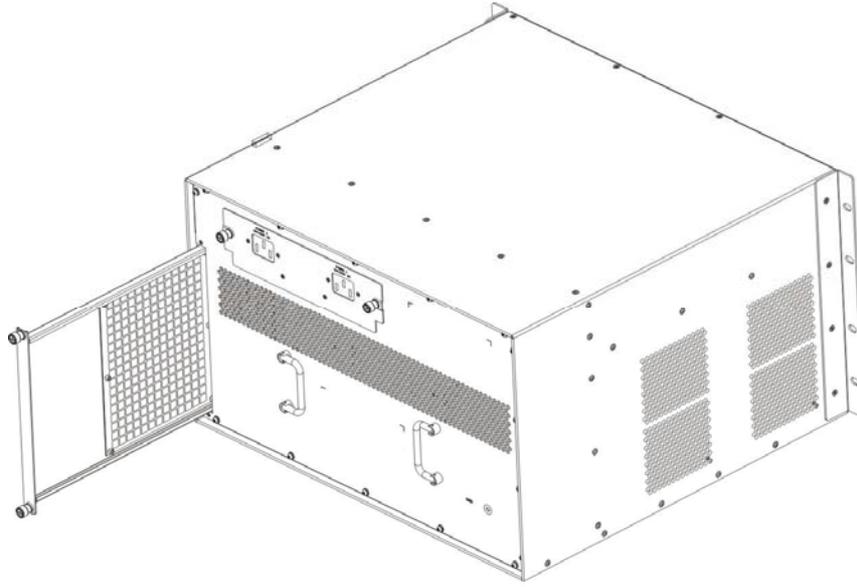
Installation and removal of the DG-CS7004 dust gauze
